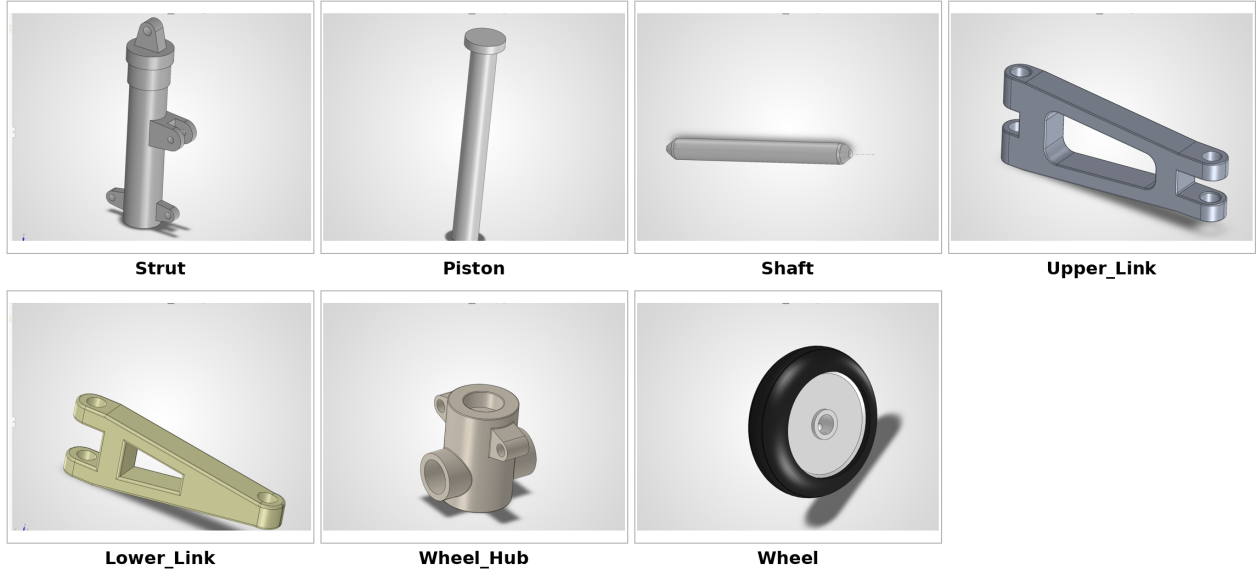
Individual SolidWorks part models comprising the assembly: Strut, Piston, Shaft, Upper_Link, Lower_Link, Wheel_Hub, and Wheel.
